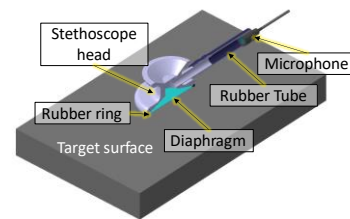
Configuration and crosscut of internal sound sensor in 3D CAD
